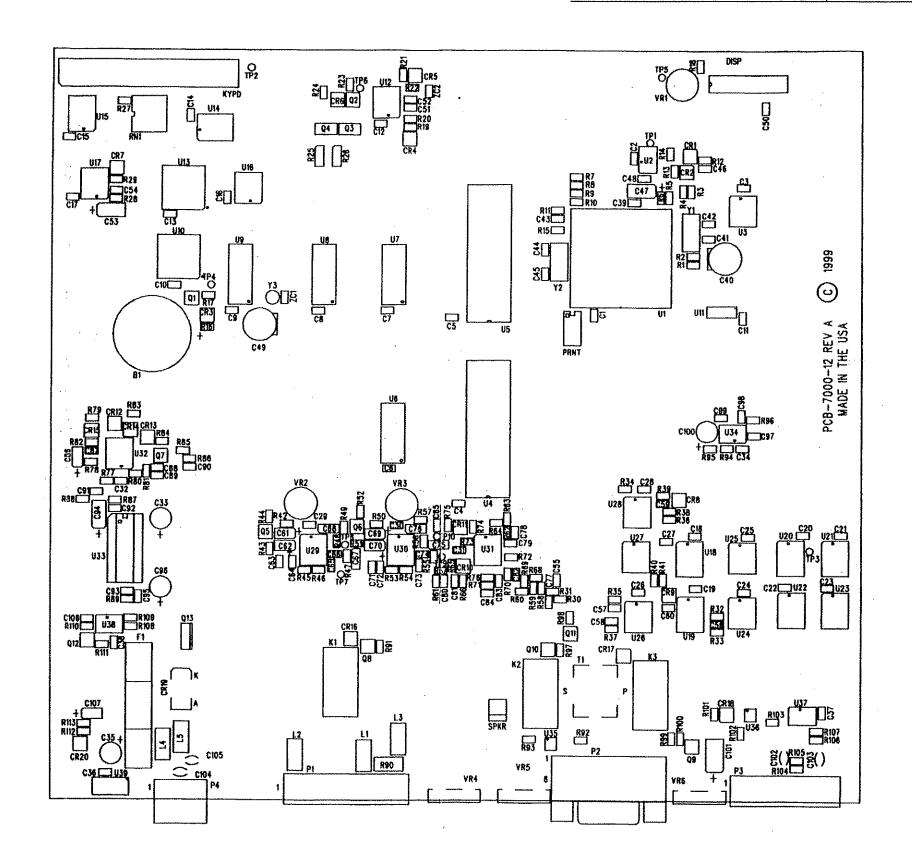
PC Assembly Main Board 1A1, page 3 of 6.
